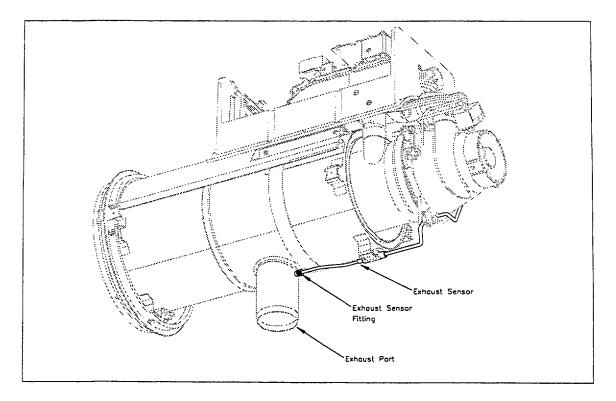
Heat Exchanger Assembly, Exhaust Sensor Fitting Location
